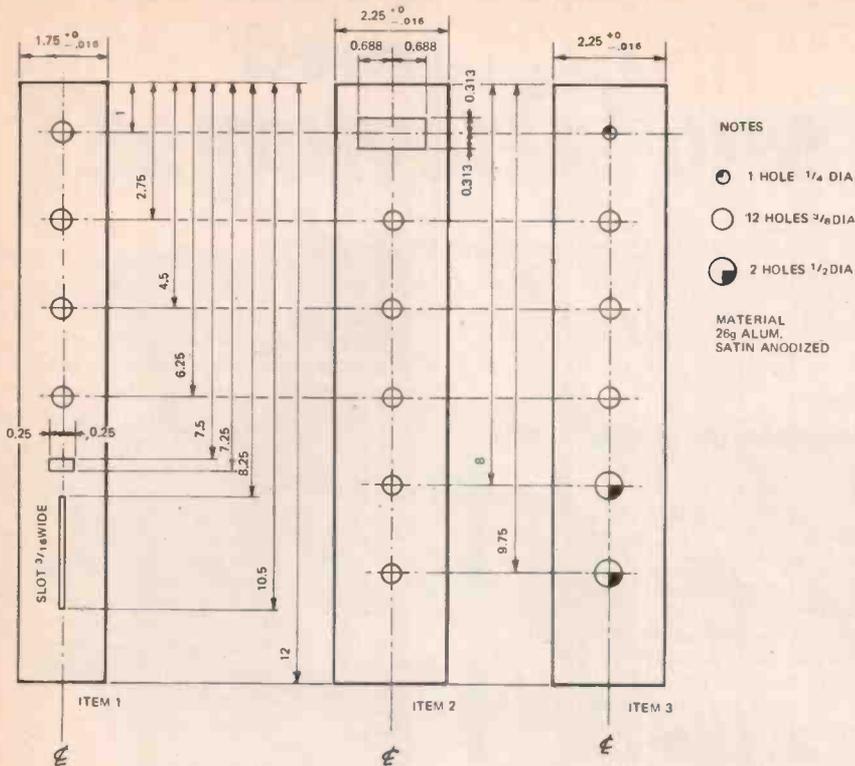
Drilling details of front panel. The holes for the meters and slide switches should be cut to suit the type used.
